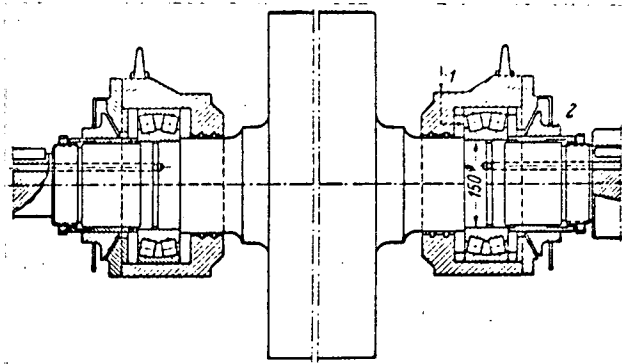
Mill cutting spindle bearings with grease amount controllers. 1: path of the grease forced in. 2. centrifuging disk.
